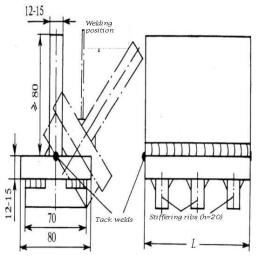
A tee-joint test assembly for cracking tests of welded joints (dimensions are given in mm):
